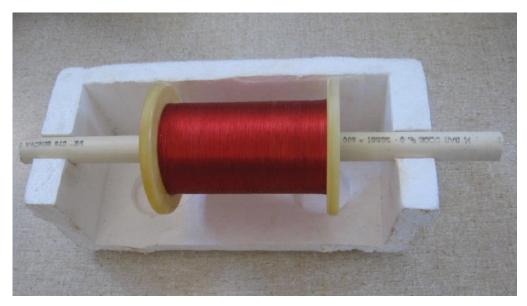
Quick and easy spool holder, cut from the corner of styrofoam packaging with ½-inch PVC pipe section.
